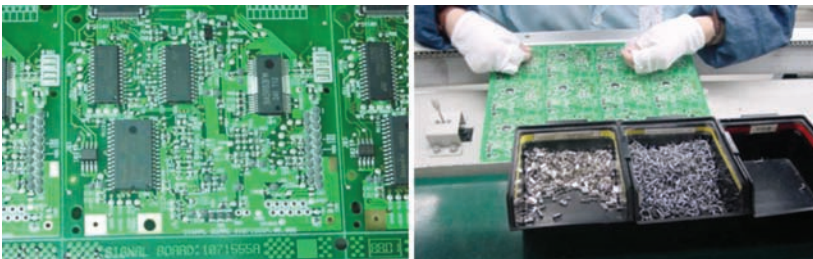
(Left) Multi-panel assembly after printing, with solder paste deposits visible over through-hole locations. (Right) Manual flow line assembly station with the preformed components in linbin storage containers ready for assembly.
